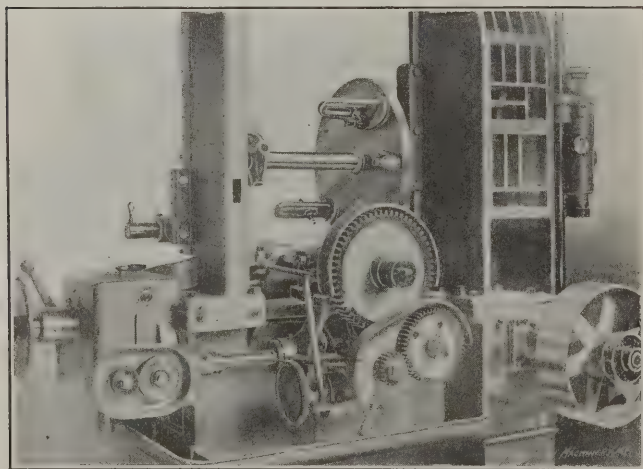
Eberhardt Automatic Gear Cutter, Rear View.
